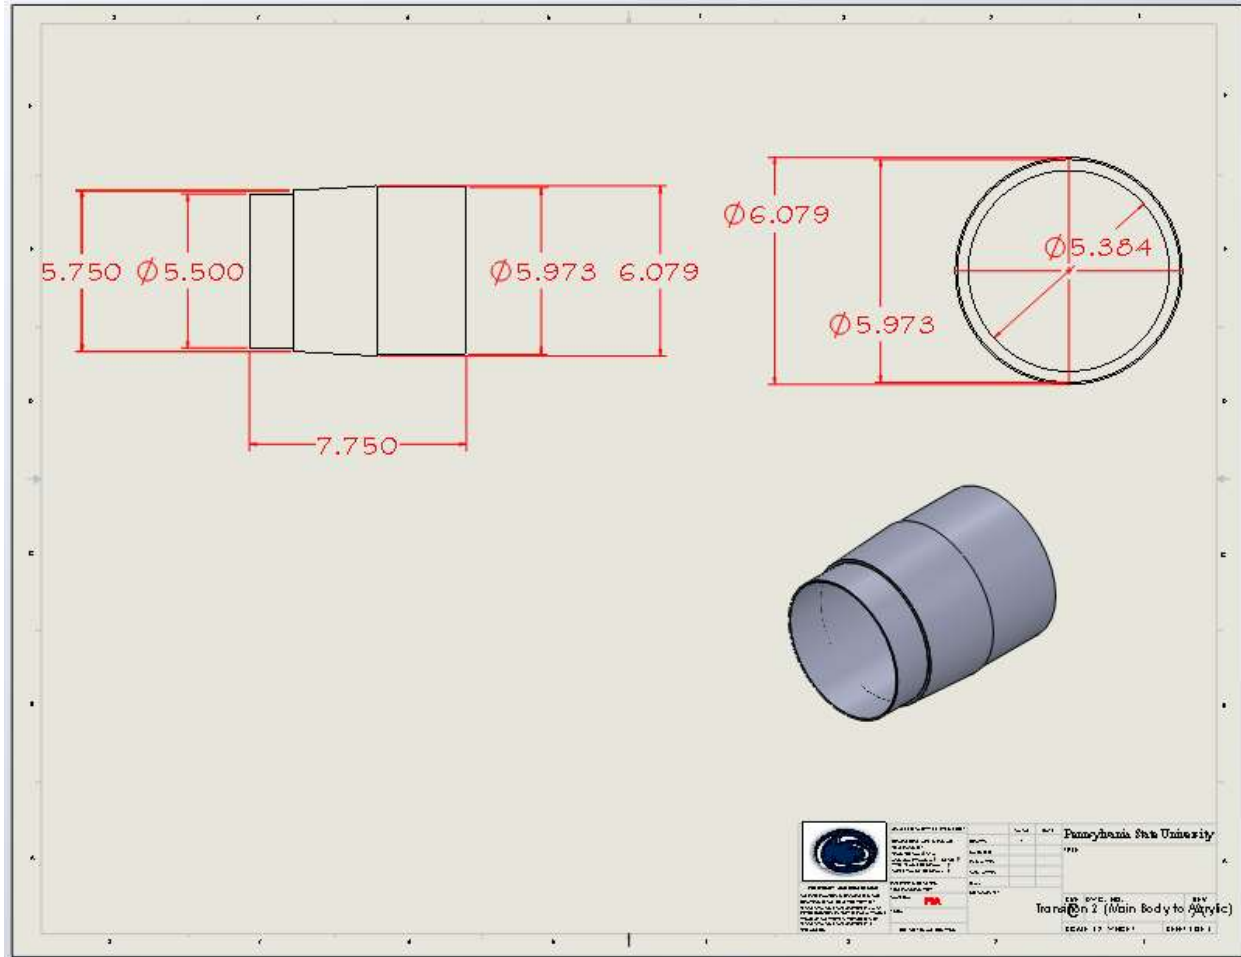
Engineering Drawing for Acrylic to Main Body Tube Transition
